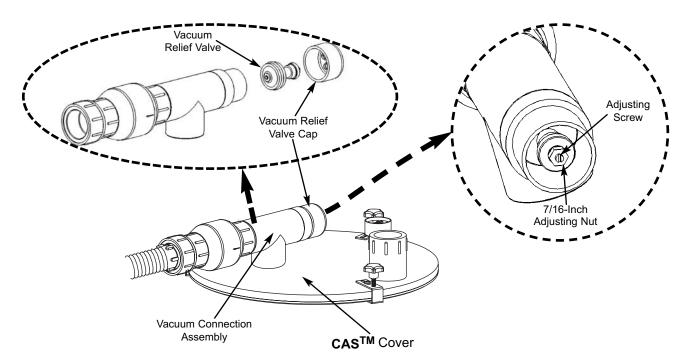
Vacuum Relief Valve Adjustment and Cleaning Detail
